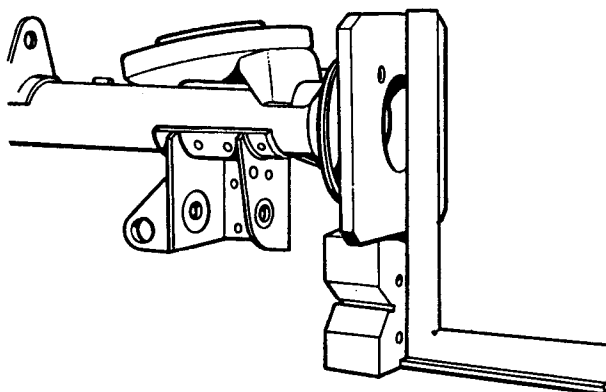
Checking Rear Axle Beam for Vertical Deformations with Angle Gauge Applied to Outer Face of Flange A.70172
